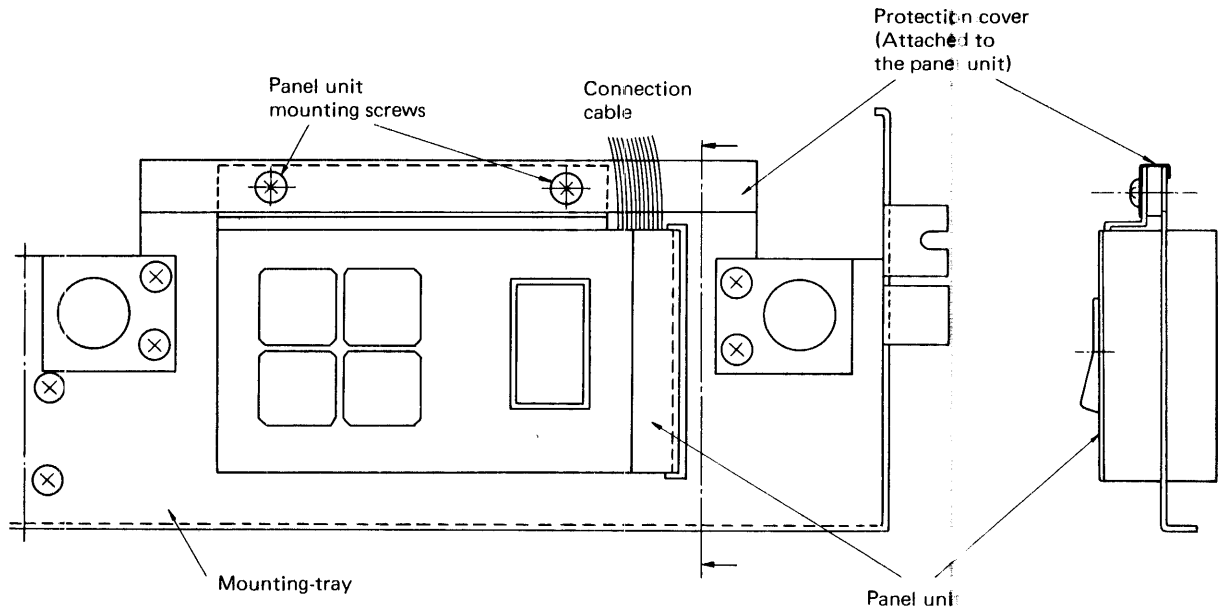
Mounting of Panel Unit on Optional Rack Mount Kit
